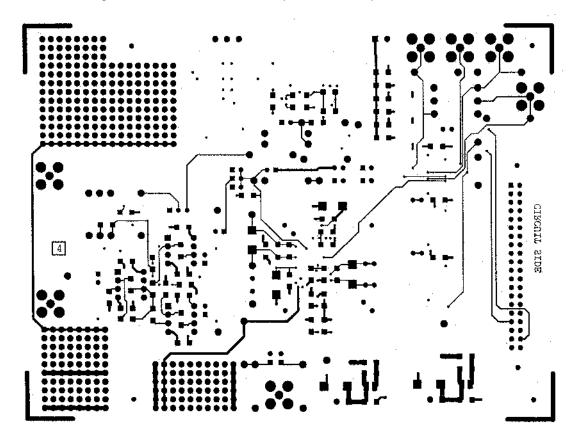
Evaluation Board Solder Side Layout (Not to Scale)
